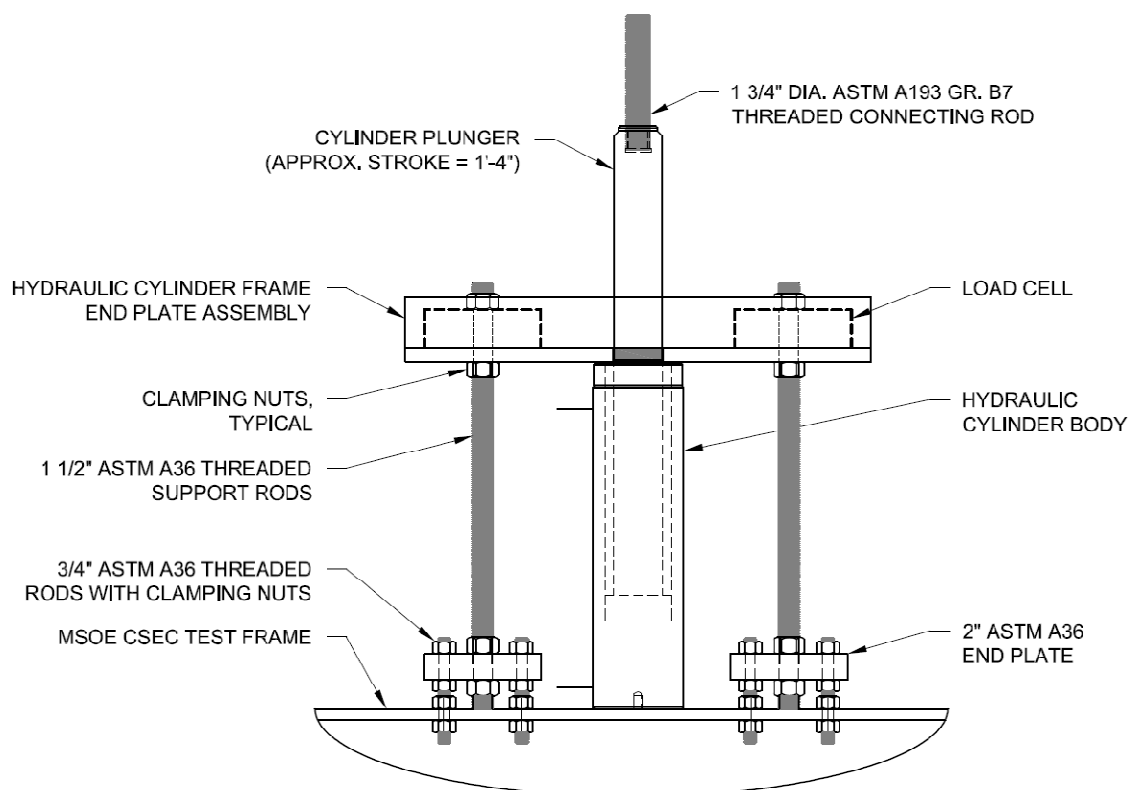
Hydraulic Cylinder Frame Assembly Overview.
